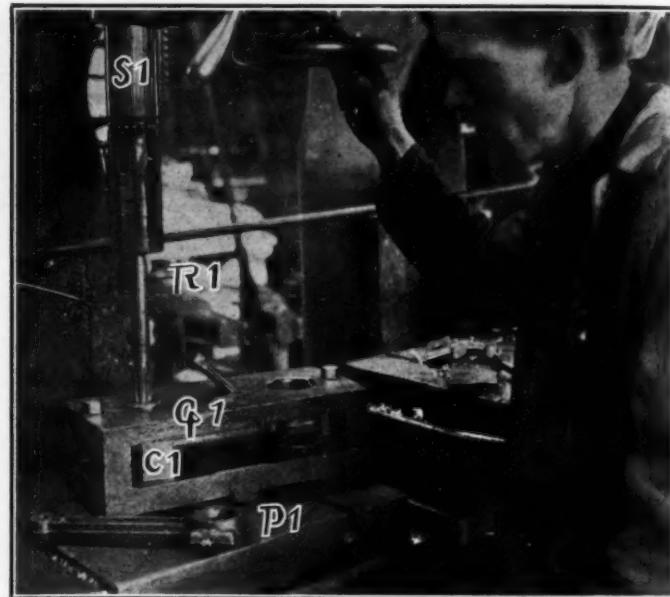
Multiple spindle drill in the Regal plant working in conjunction with a jig fixture, reaming connecting rods
